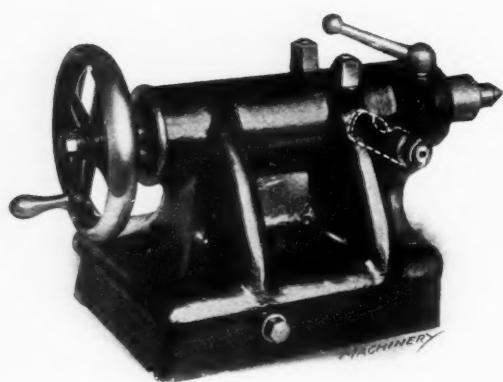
Tailstock of Lehmann Lathe, showing Improved Spindle Locking Device
